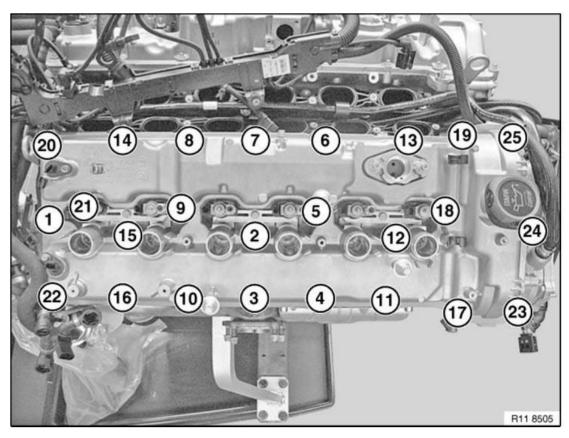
Identifying Cylinder Head Cover Screw Courtesy of BMW OF NORTH AMERICA, INC.
